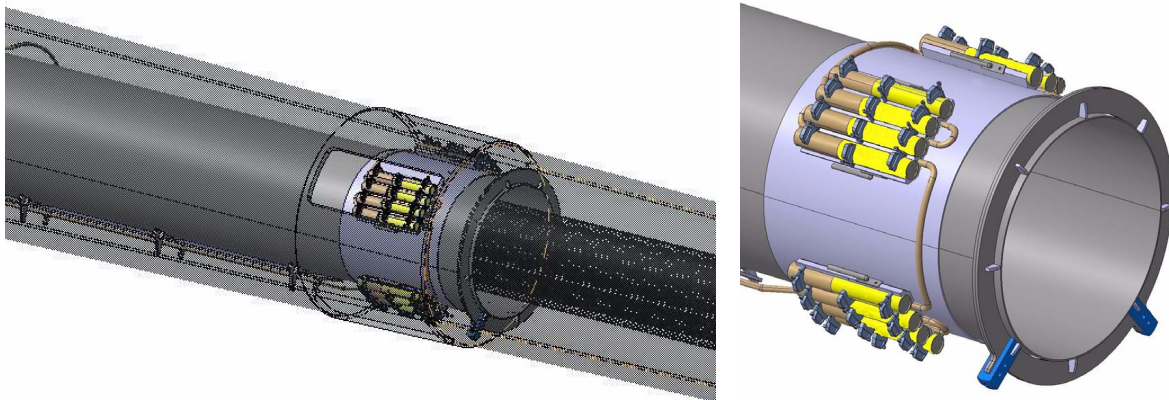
The drawings show the present LUCID-2 PMT detector. The drawing on the left shows the photomultipliers attached to a carbon fiber support cylinder that in turn is attached to the VJ beampipe support cone. The drawing to the right shows how the PMTs are attached to a water-cooled aluminium support system that is attached to the support cylinder.
